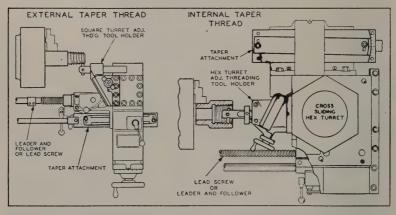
Using a taper attachment in connection with a thread chasing attachment.
